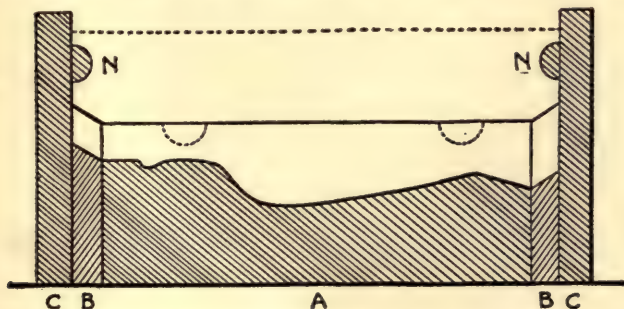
Sectional view of mold ready for casing. *A*, mold. *B B*, offset plates. *C C*, end plates. *N N*, natches.
